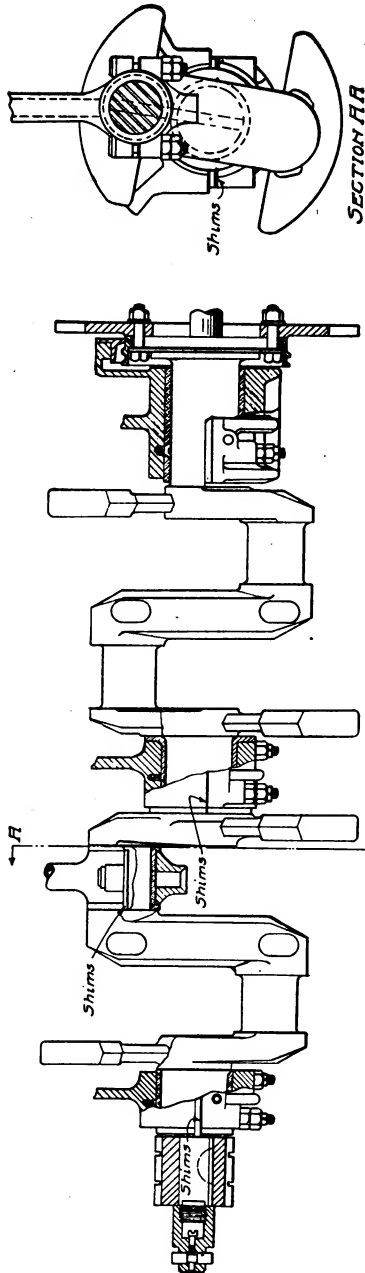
Four-Cylinder Three-Bearing Balanced Crankshaft
